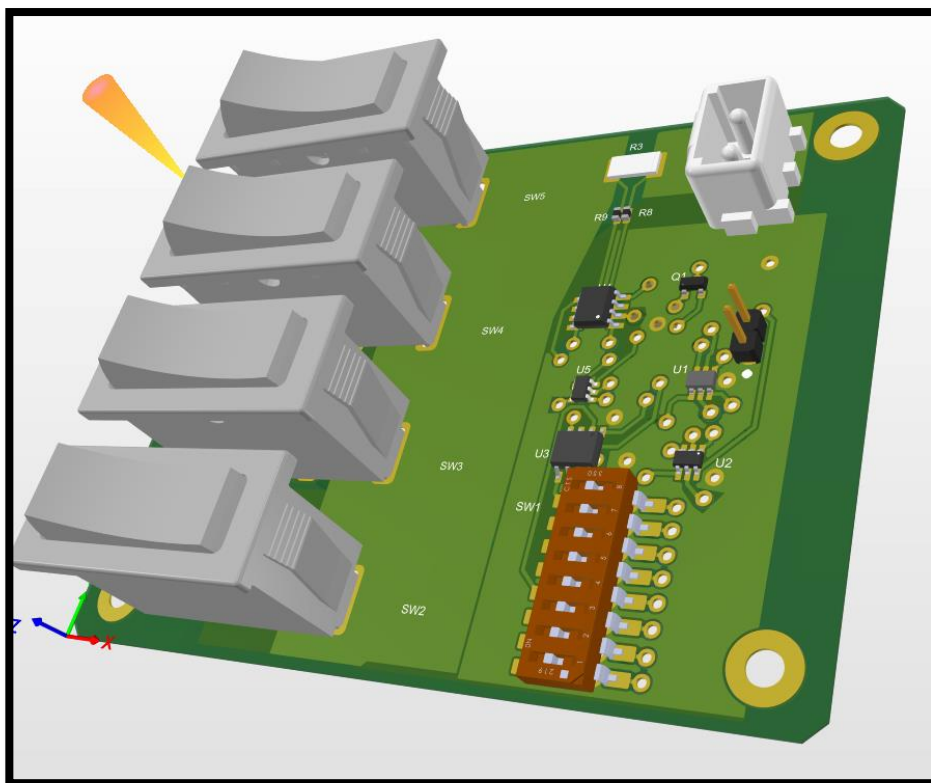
The 3D View of the Top Layer of the Finalized PCB
